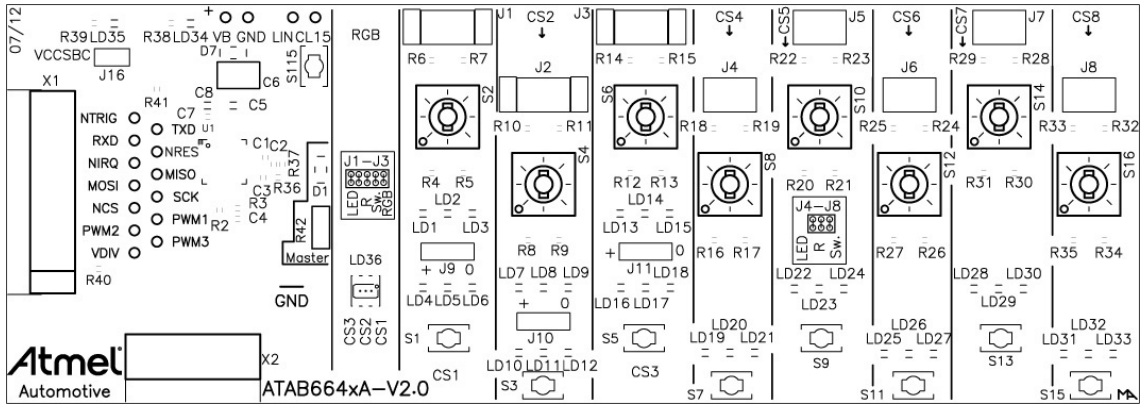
Atmel ATA664151 Board; Top Side, Top View
